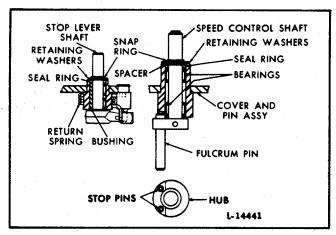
Cross Section of Governor Cover (Fuel Squeezer Engines)
